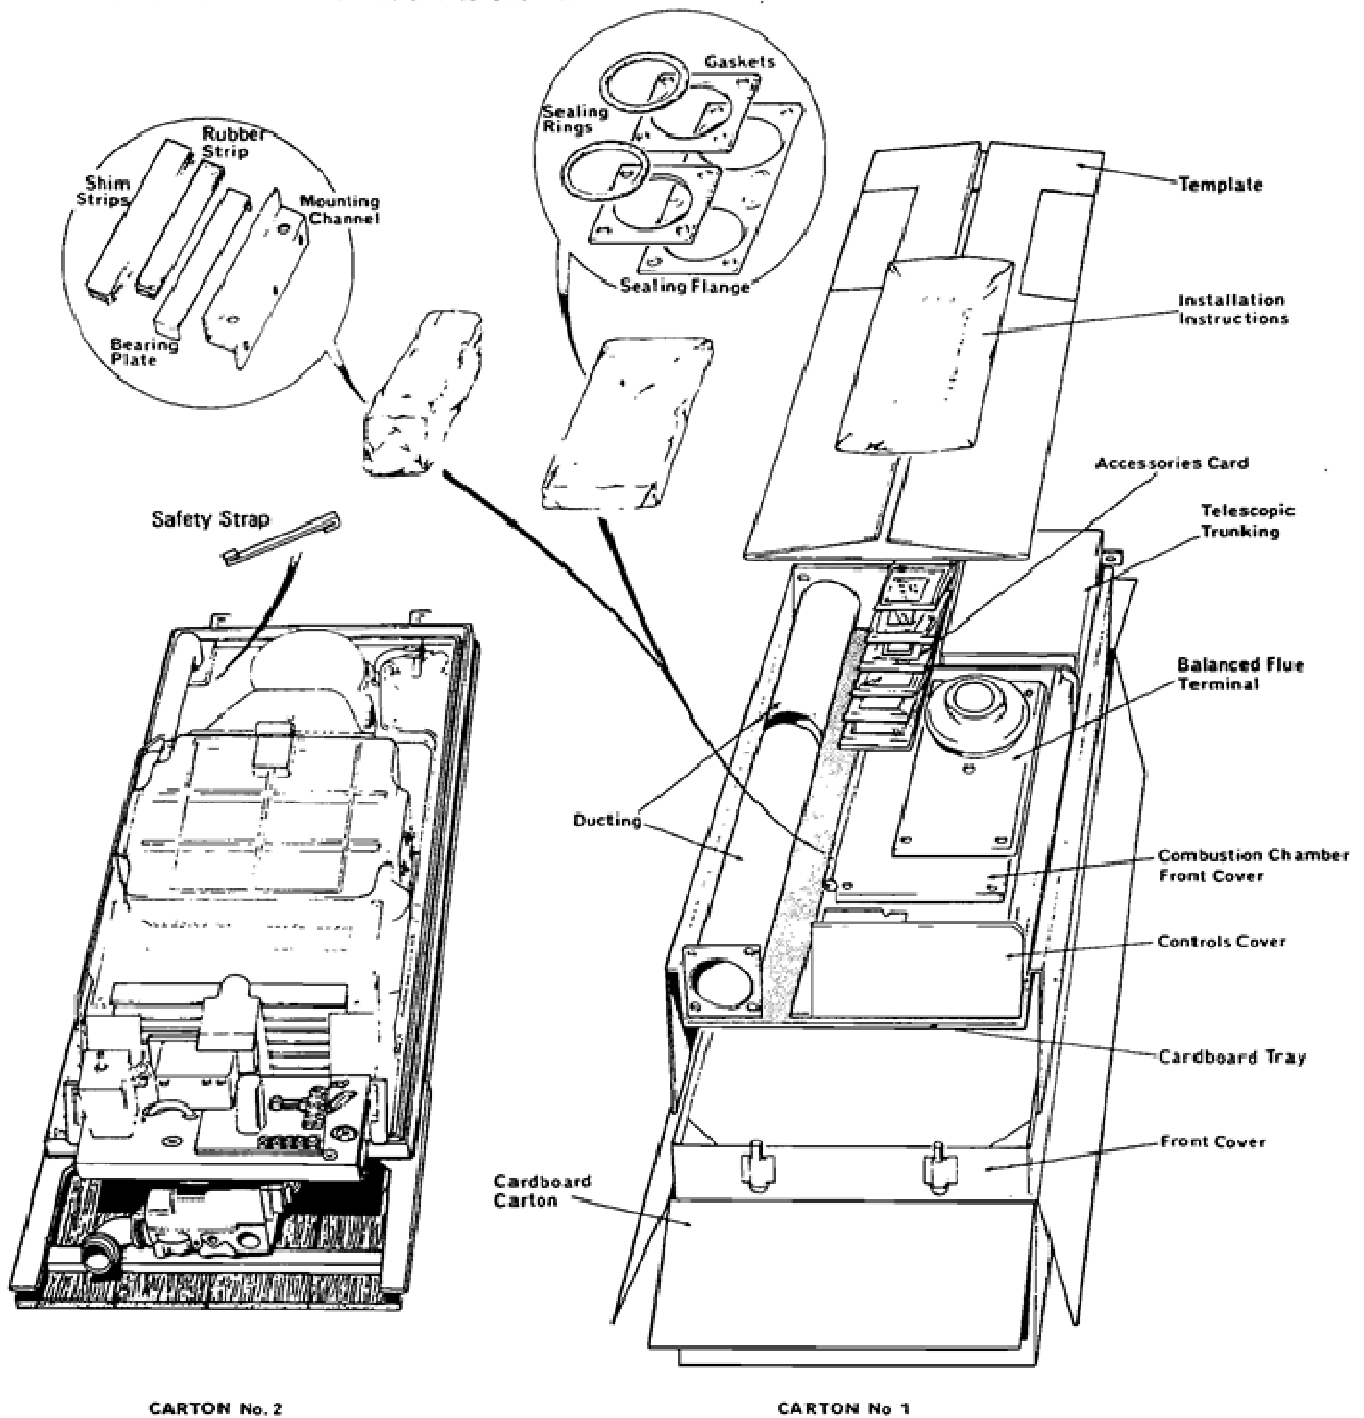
PACKAGING AND IDENTIFICATION OF COMPONENTS
